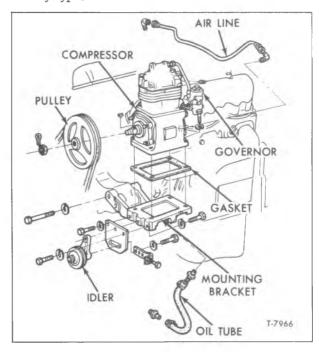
Air Compressor Installed (Typical Left Side Mount)
